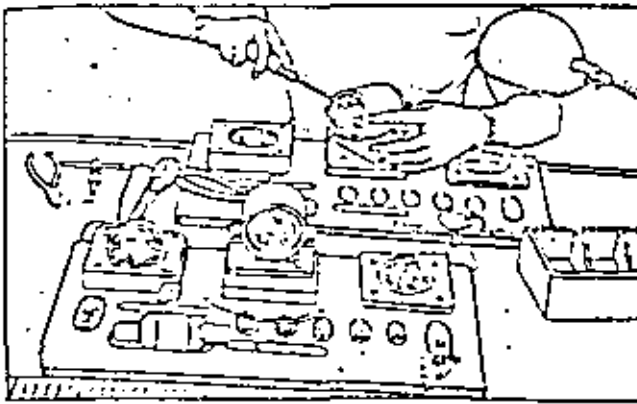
Parts are brought to a matching-parts storeroom. Here a girl loads each pallet with all material necessary to assemble one complete unit. Parts are placed in definite locations. Each pallet has assembly fixture attached. Loaded pallets go on conveyor belt from storeroom to assemblers. Assemblers pull pallet off belt, assemble unit on pallet, send complete unit to inspector via same belt, and return empty pallet by second conveyor under workbench.
